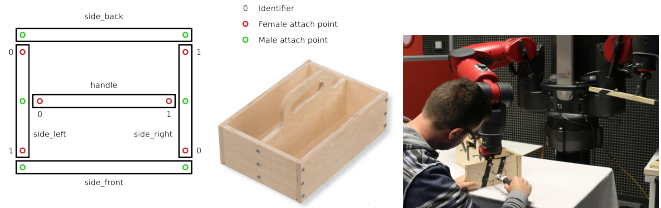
The toolbox domain. A box can be assembled in a easier and efficient way if a collaborator robot helps by providing the new parts and by holding parts in place to make screwing easier for the user.
